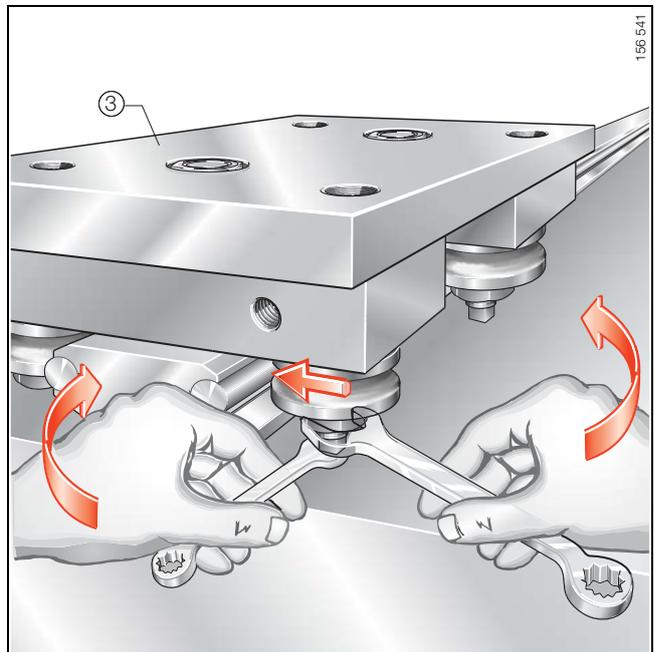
· Fitting the carriage and setting the profiled track rollers clearance-free
